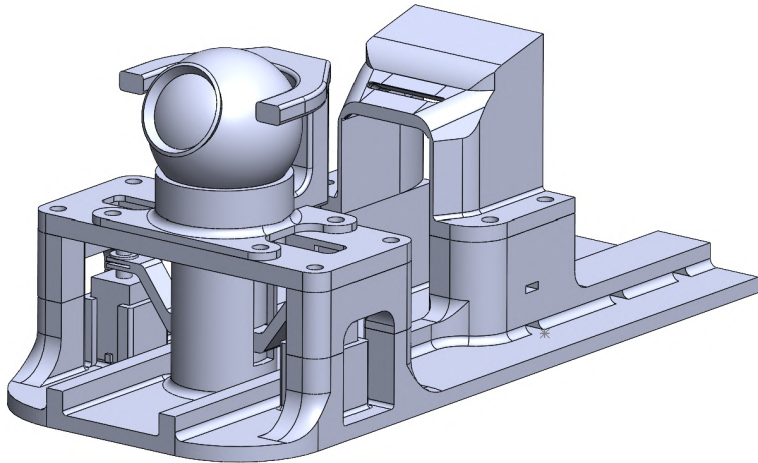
CAD assembly of the marking device, showing the handle, the mounting and locking of the reflector, and the general design of the device.
